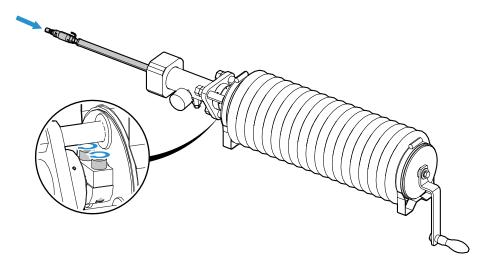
Mounting the docking rod and fixing the coupling to the spindle assembly
